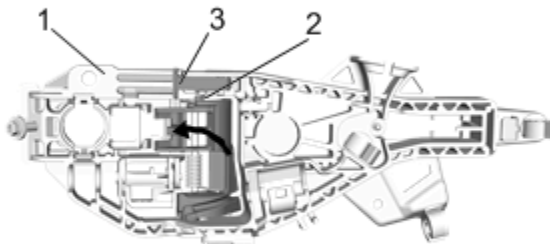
Side Door Outside Handle Bracket, Counter Balance And Bracket Clip
